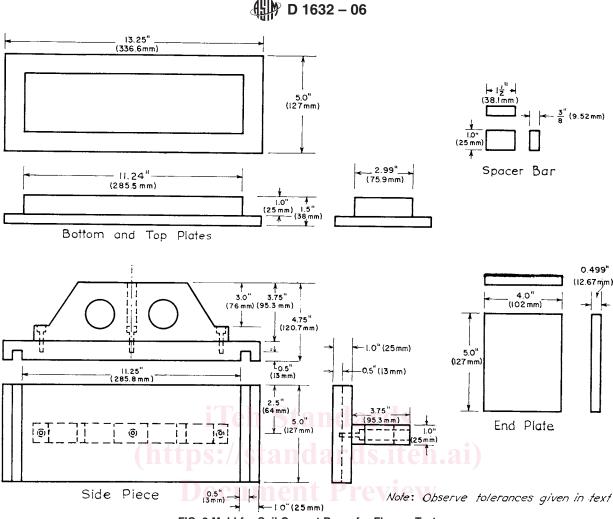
Mold for Soil-Cement Beam for Flexure Test
